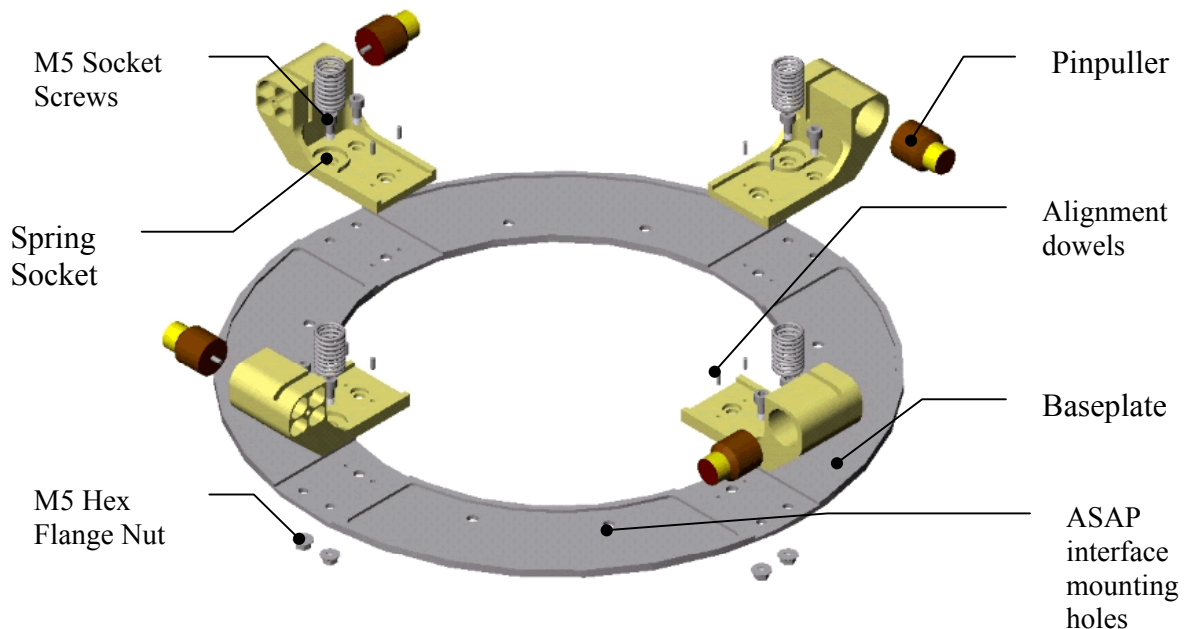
MLA Assembly showing the base, the pinpullers and their housing
